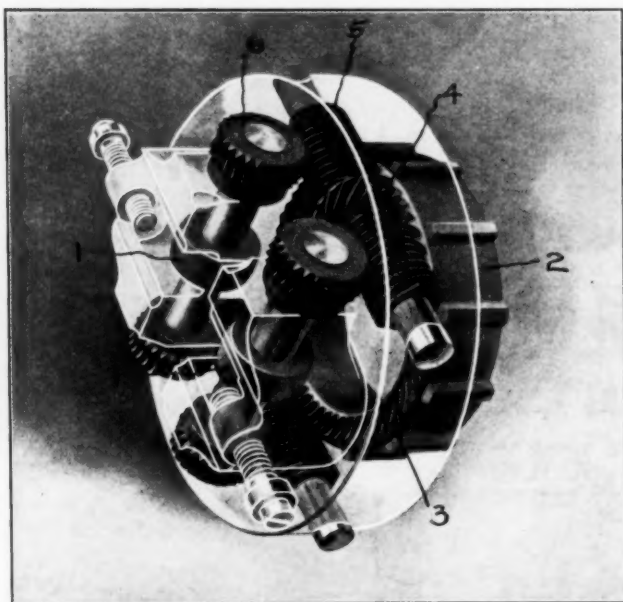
ROLLER FEED. JONES & LAMSON MACHINE CO.
